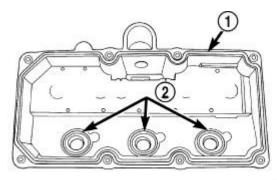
Cylinder Head Cover Bolts Courtesy of CHRYSLER LLC
